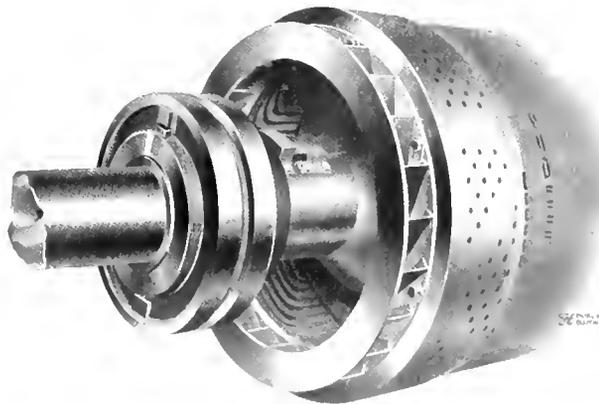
End View of Rotor of Turbine-Driven Alternator, Showing Collector Rings, Fans, Field Coils and Retaining Ring
